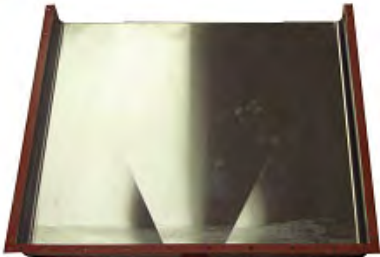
SPLIT LINER BOTTOM WITH GASKET
